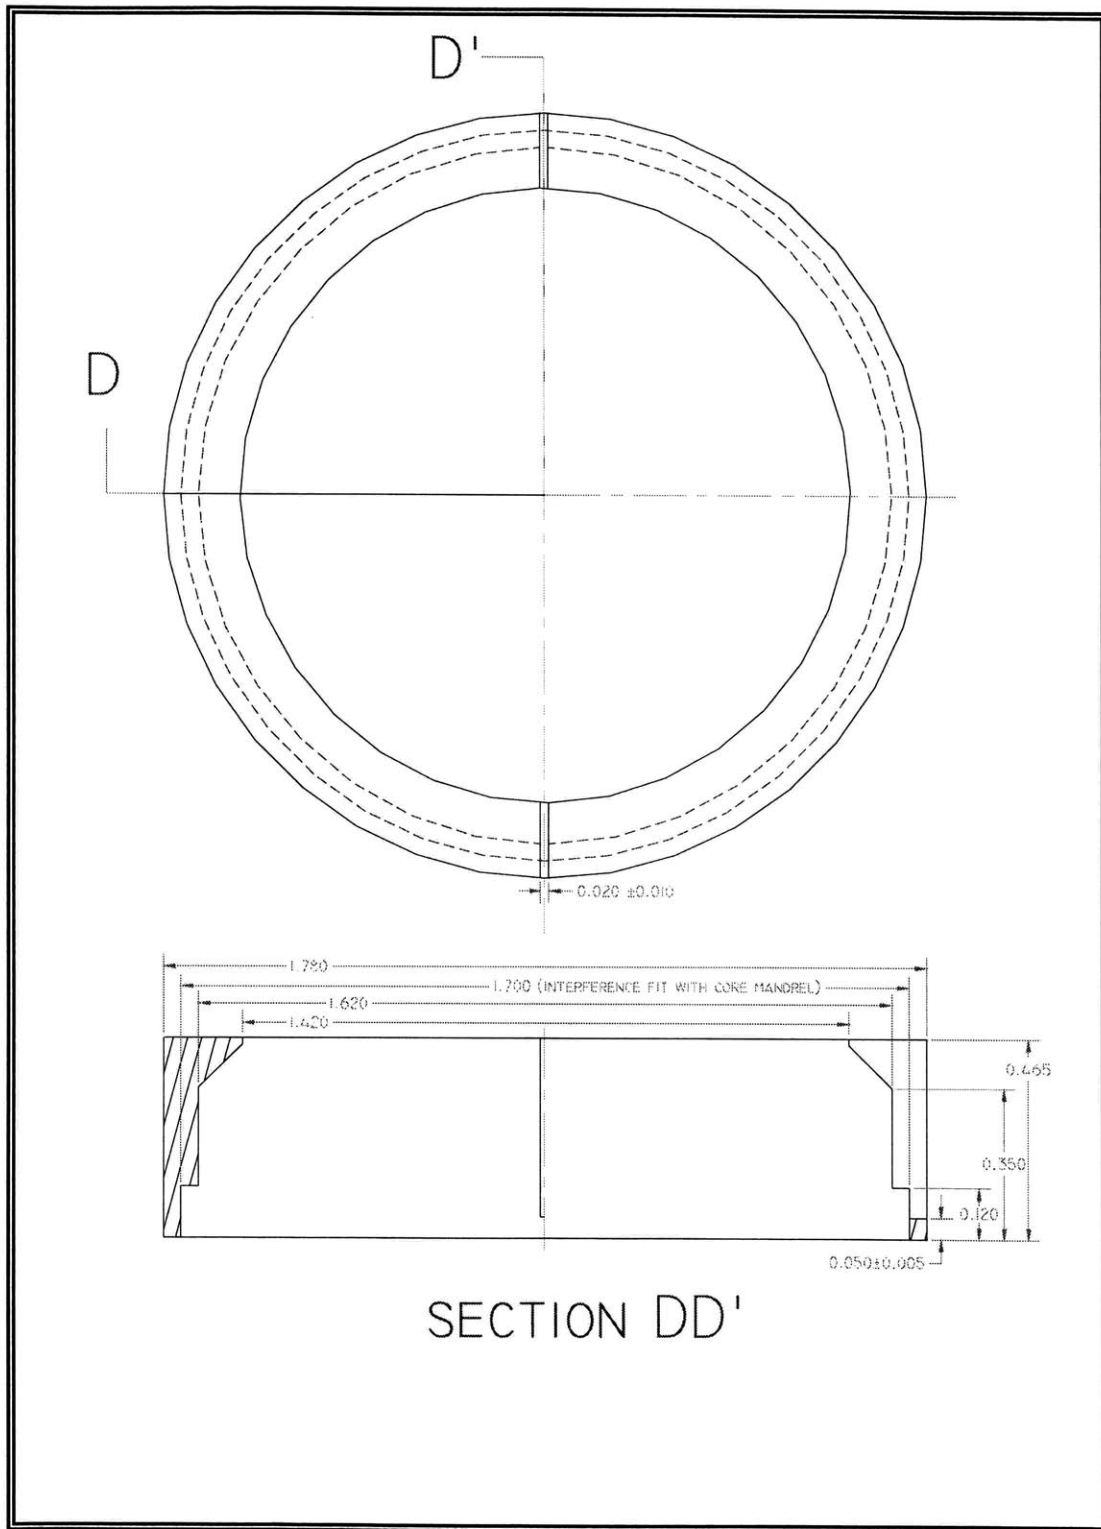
The outlet valve cover contains a step in its inner radius to assure proper alignment with the valve spool piece when the two are assembled
